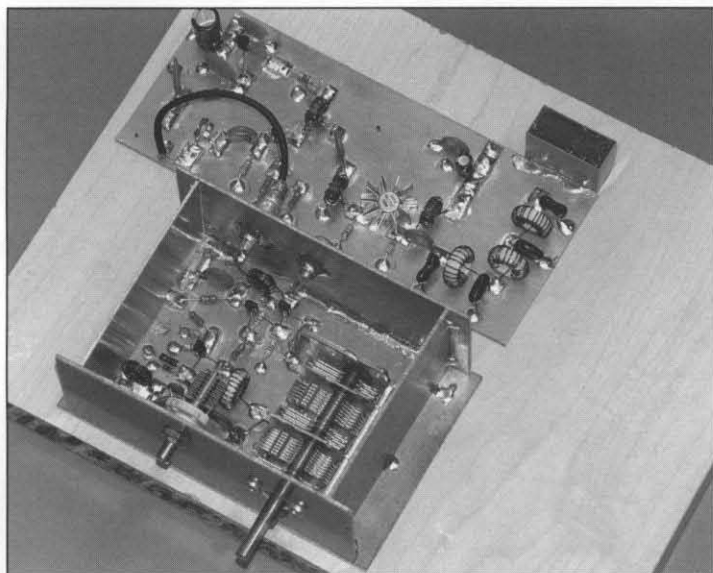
One option for mounting the VFO and transmitter boards is to use a piece of particle board.
